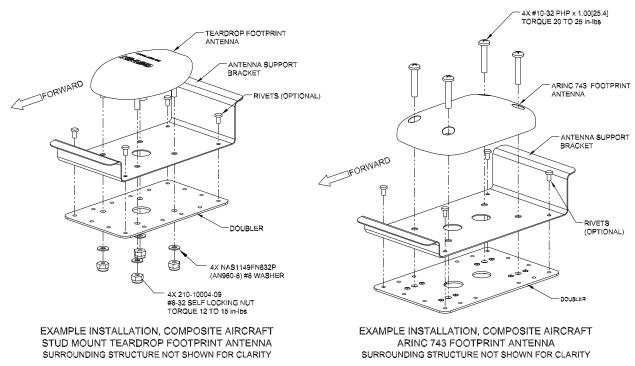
Example Bracket Antenna Mounting Under Glareshield
